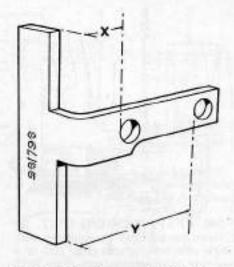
Adjusting gage (DB-961796) for hydraulic control mechanism. Dimension "X" is 71.1 mm (0.437 inch); dimension "Y" is 60.1 mm (1.580 inches).
